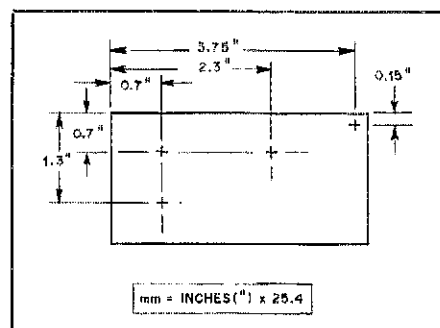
If the circuit-board pattern shown in Fig. 8 is followed this drilling template can be used to locate the mounting hole and holes for the LED indicators.
